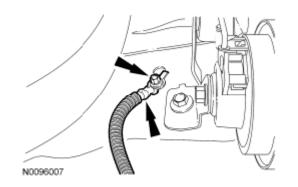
Locating Electronic Power Assist Steering (EPAS) System Wiring Harness Ground <u>And Bolt</u> Courtesy of FORD MOTOR CO.
